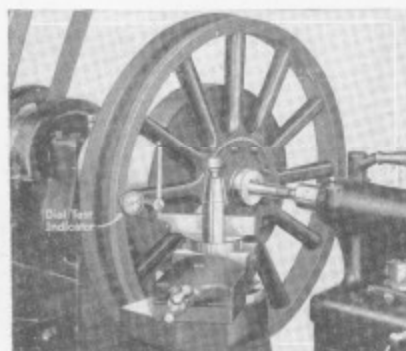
Testing a Wheel Felly for Wobble Using a Dial Test Indicator.
